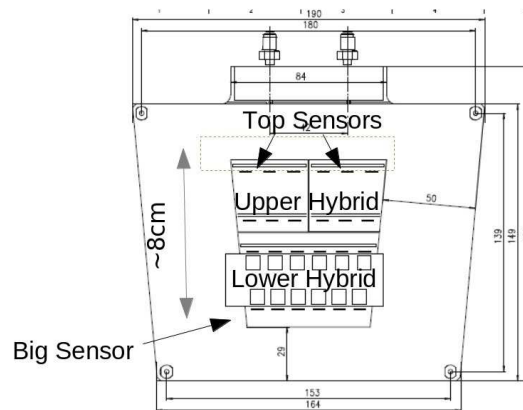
Schematic view of a Petalet with all its components and dimensions.
